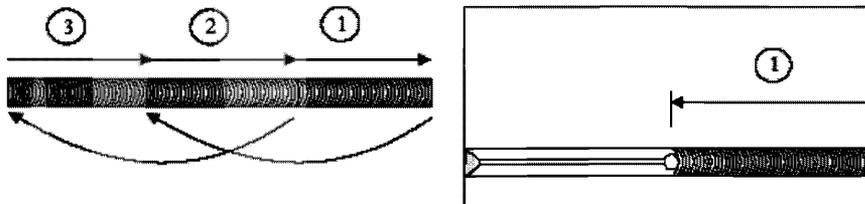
c Welding sequence for cracks with length less than 300 mm
